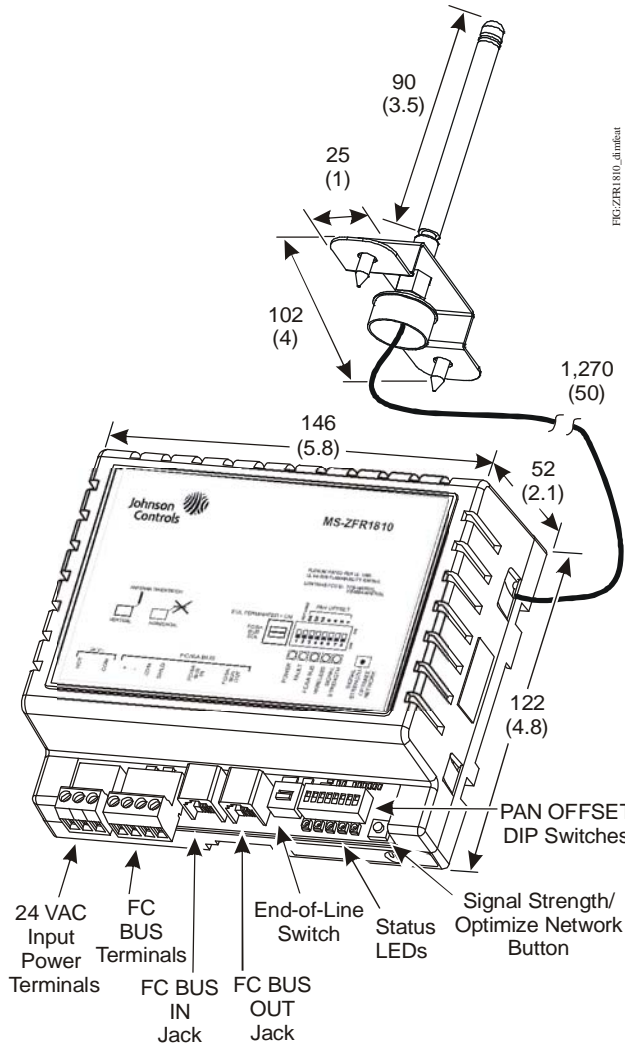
ZFR1810 Wireless Field Bus Coordinator, Physical Features and Dimensions, mm (in.)
